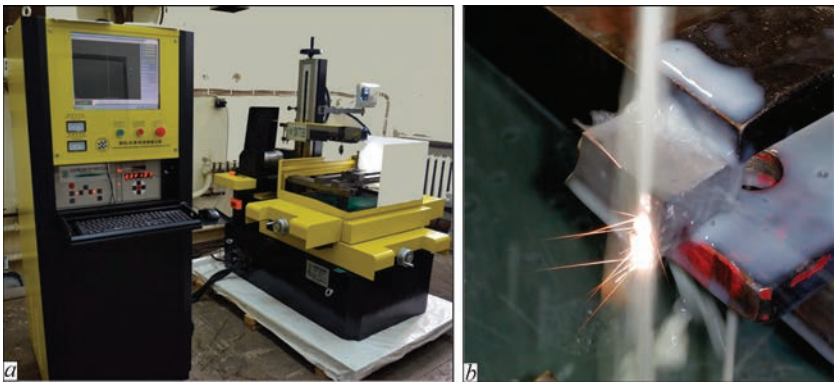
Appearance of the electrical discharge cutting machine DK7732 (a) and photo of the process of cutting a sample of tungsten single crystal (b)
